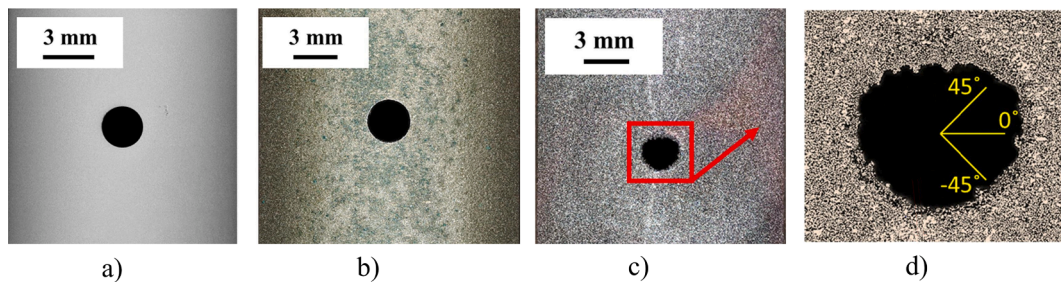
Hole in thin-walled tubular specimen: a) machined by drilling in a wrought component; b) machined by drilling after AM process and left in the as-built state; c) built during the AM process; d) magnification of c). Figure adapted from [223].
